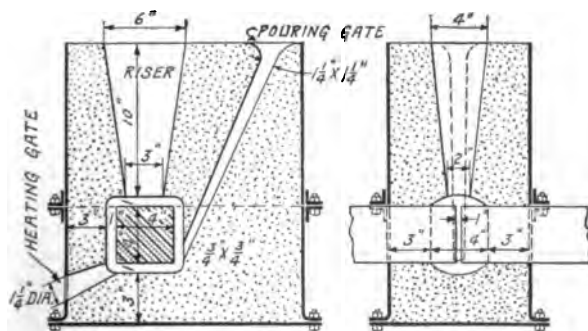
Section of Typical Thermit Mold Showing Riser, Pouring Gate, and Heating Gate
